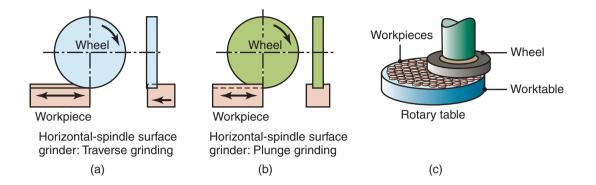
Schematic illustrations of various surface-grinding operations. (a) Traverse grinding with a horizontal-spindle surface grinder. (b) Plunge grinding with a horizontal-spindle surface grinder, producing a groove in the workpiece. (c) A vertical-spindle rotary-table grinder (also known as the *Blanchard* type).
